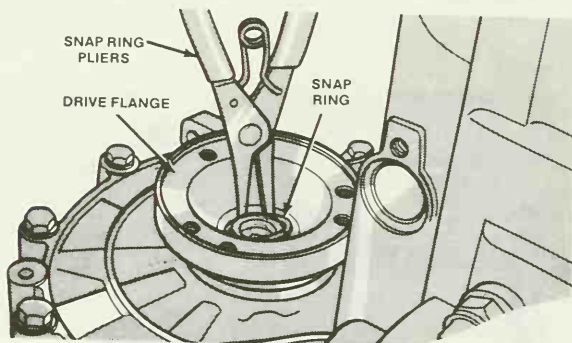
Removing the drive flange snap ring. (Chrysler Corporation)
